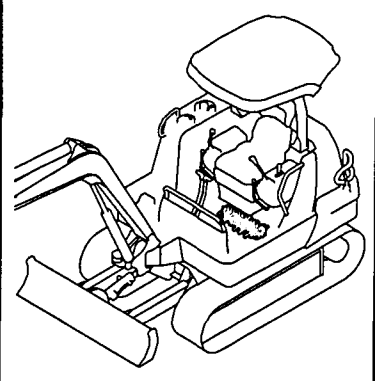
HYD. OIL PIPING (VALVE~MOTOR~BOOM)
